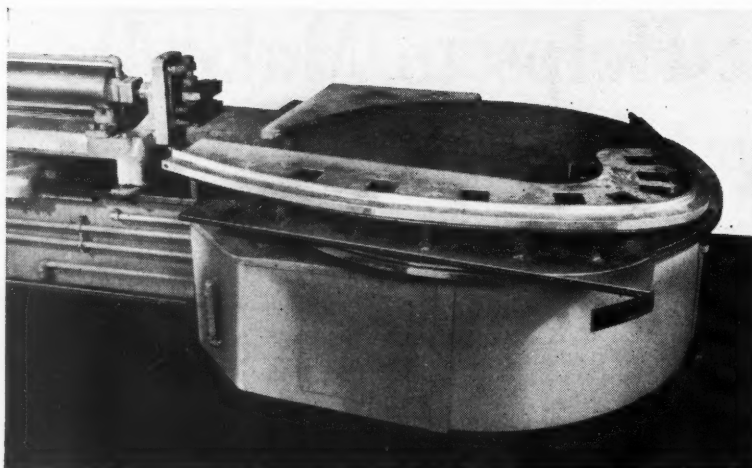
The completed form die ready for test forming to check springback in the finished product. Adjustments for regulating the springback are made by means of screws or wedges
